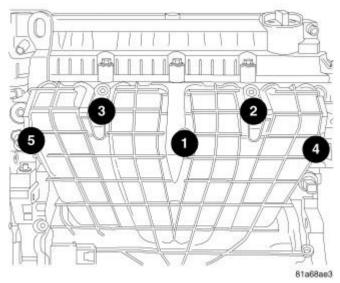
Intake Manifold Bolt Removal & Tightening Sequence Courtesy of CHRYSLER GROUP, LLC
